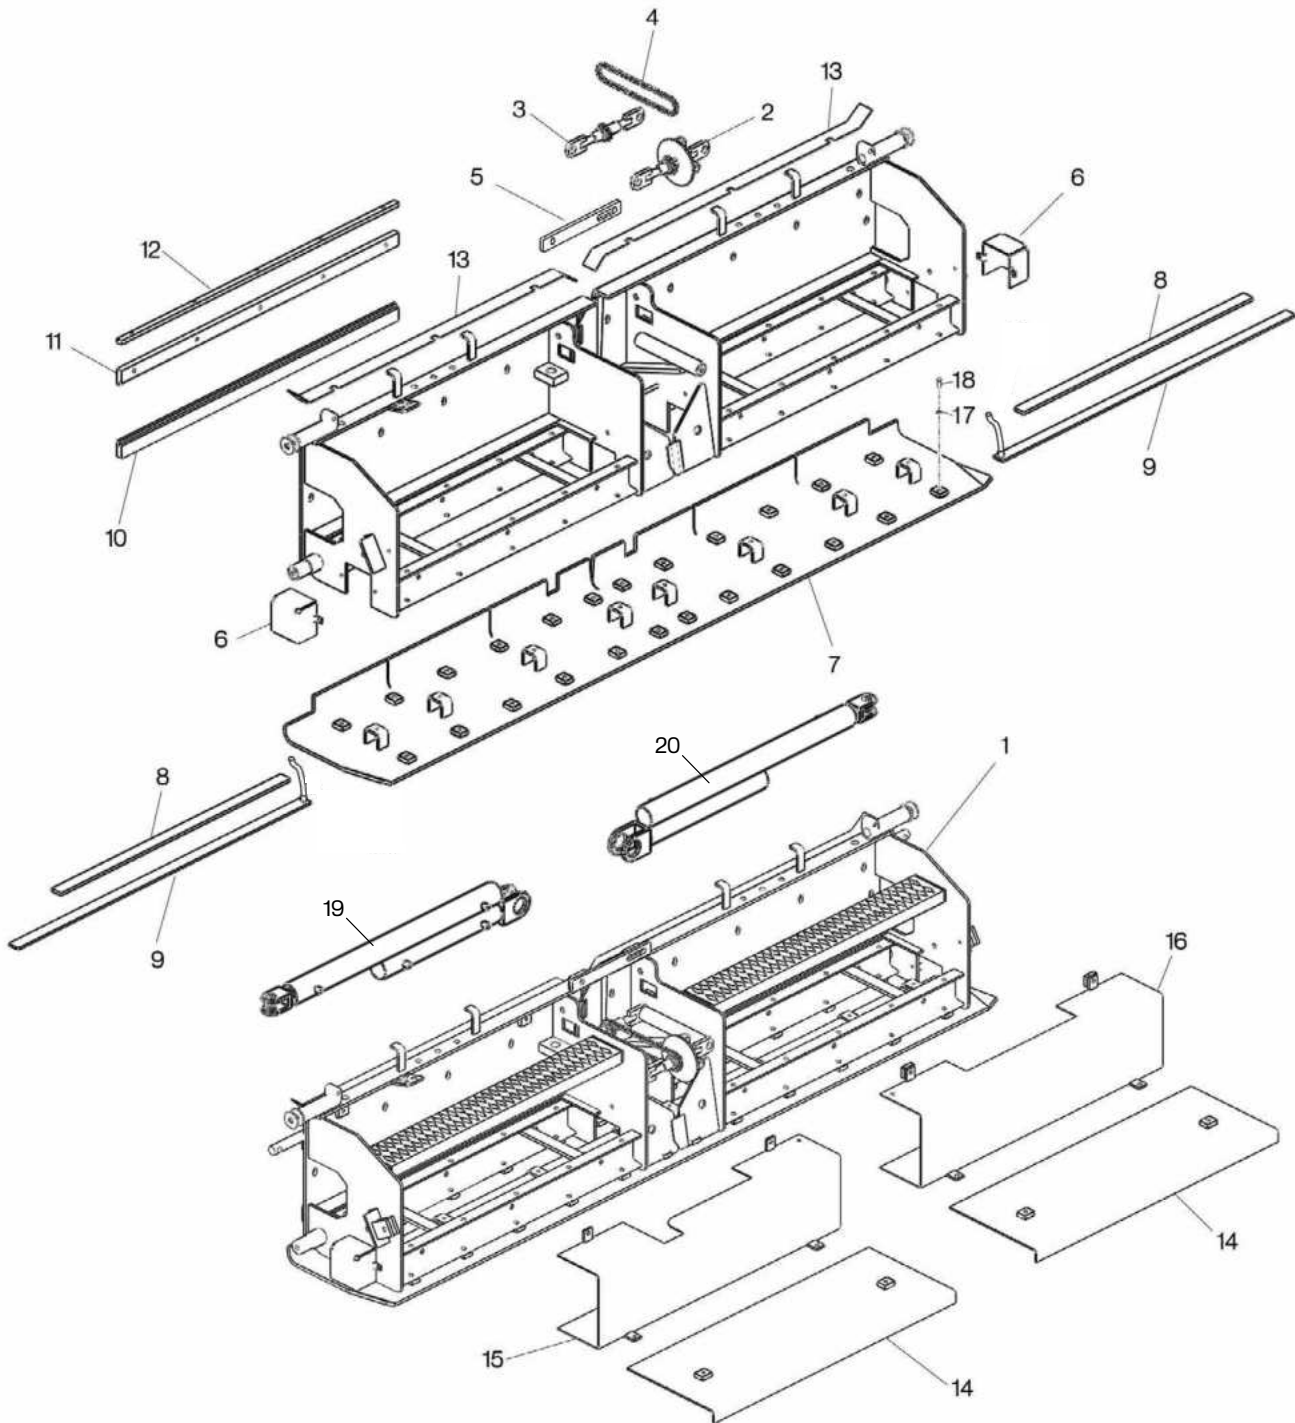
Option - Legend Non-Sloping Screed Frame Assembly
